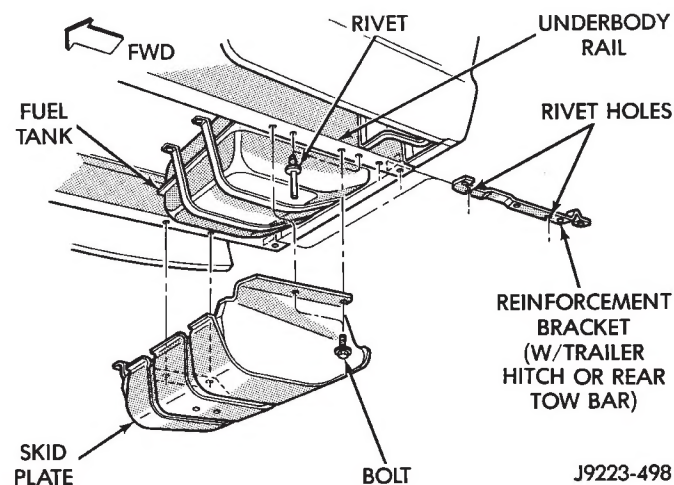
Fuel Tank Skid Plate With Trailer Hitch Or Tow Hook
